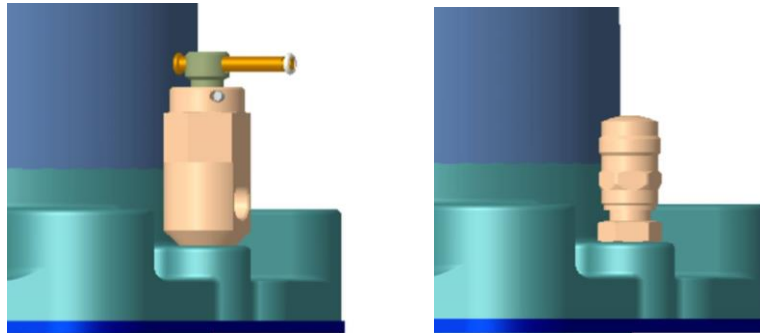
Valve with 1/8" NPT (left) ready for testing. Valve without outlet (right) requires removal for testing.
